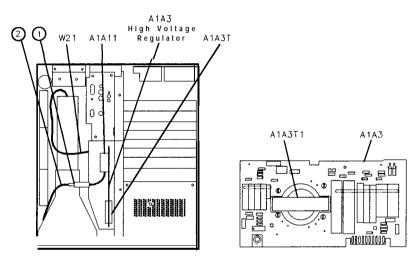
Discharging the CRT Post-Accelerator Cable
